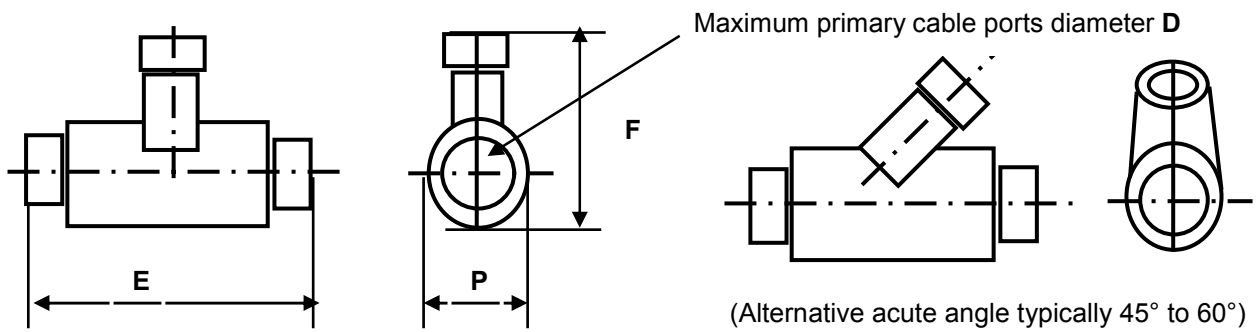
Diagram showing tee – Closures dimensions showing single ports
